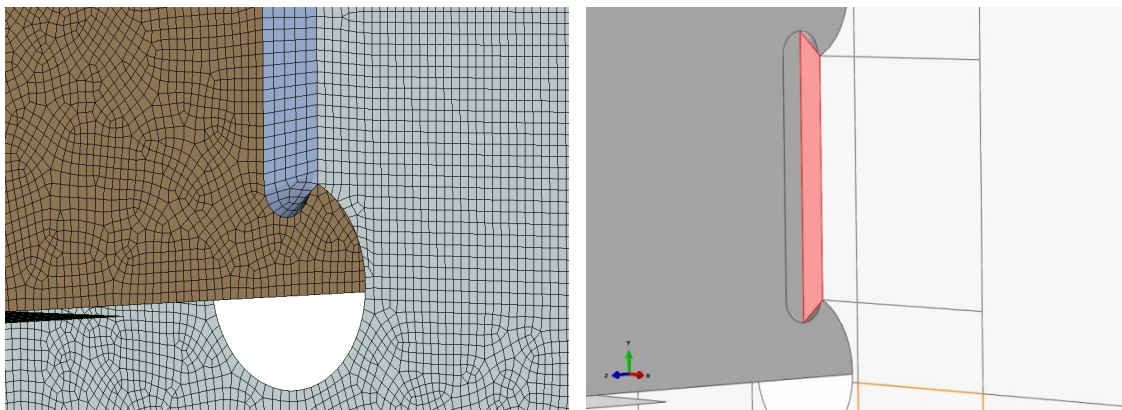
Weld modelling using oblique shell elements by joining attached plates to the parent plate in a common node.
